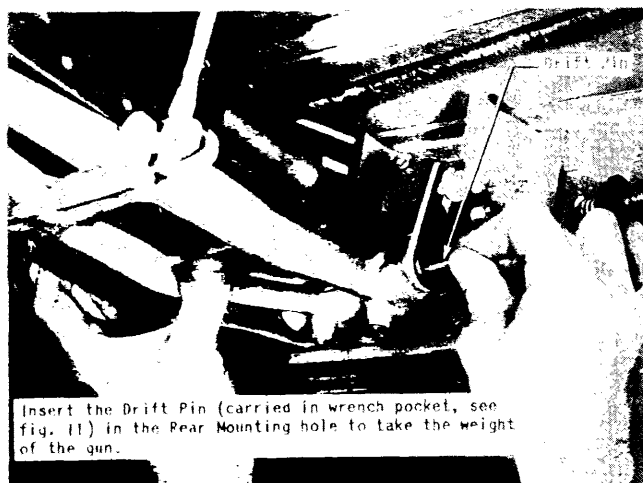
Installation of Driftpin in Rear Mounting Hole
